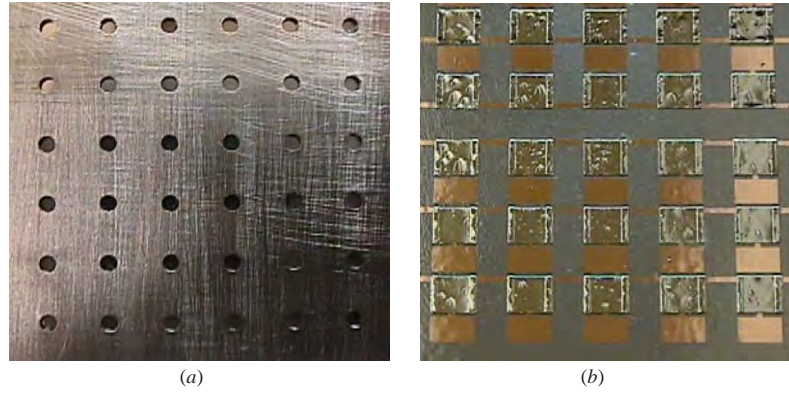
Photomicrographs of fabricated pressure sensors. (a) Side exposed to environment. (b) Rear view showing surface micromachined backplate.
